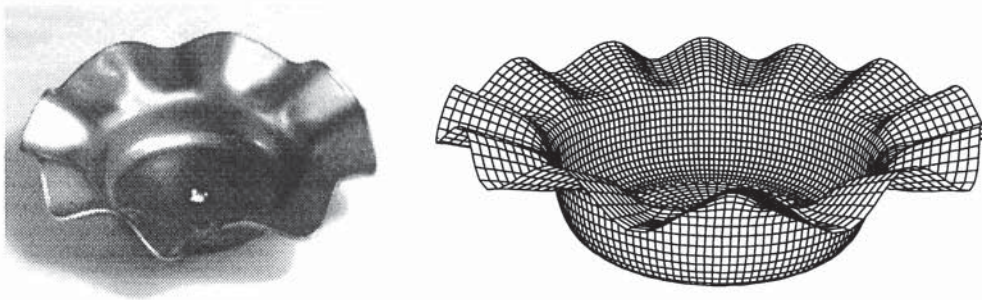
Cup drawn with a blank holder force on 1.6 kN.
